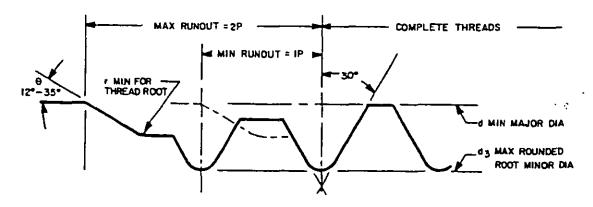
INCOMPLETE FORMED THREADS, FULL SHANK FASTENER - STANDARD DIAMETER
